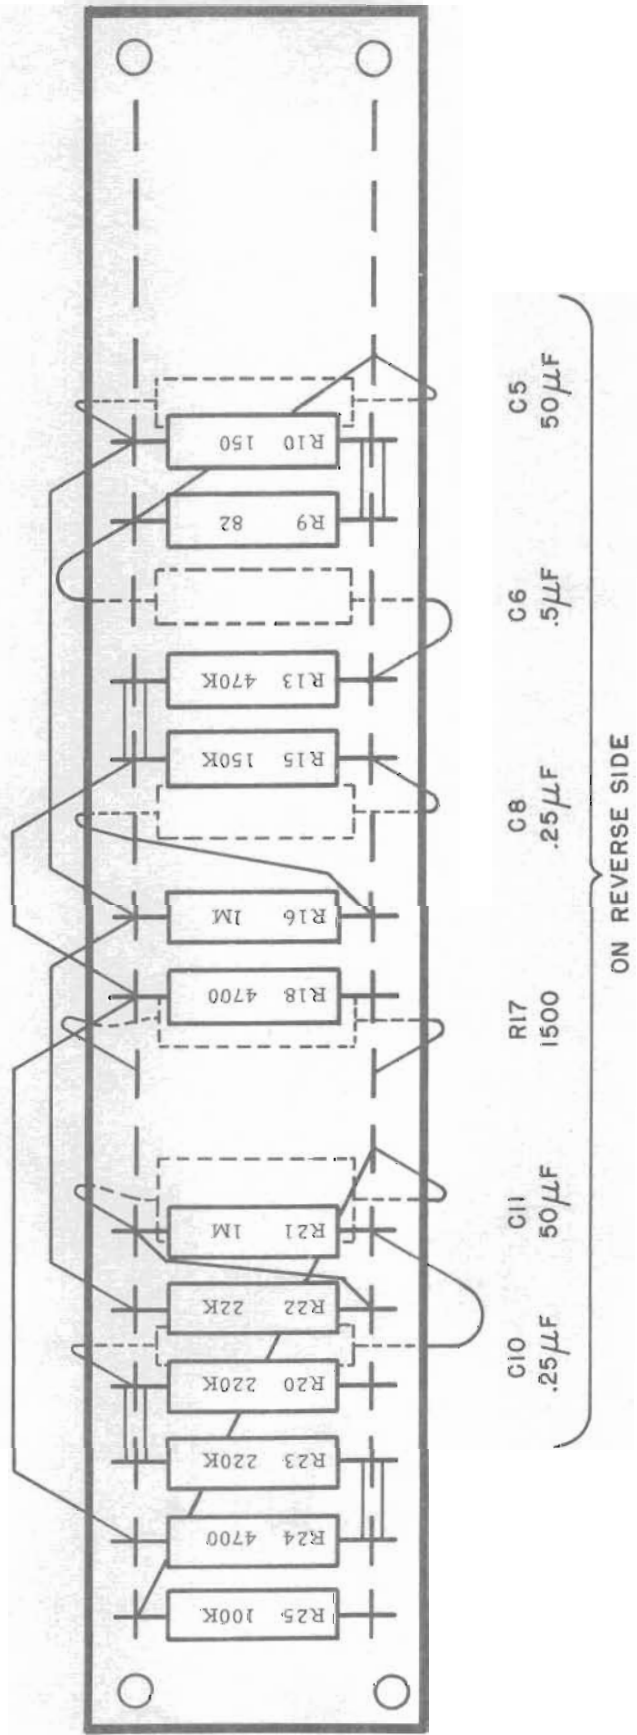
Model 204A Bottom View Bottom Plate and Case Removed
